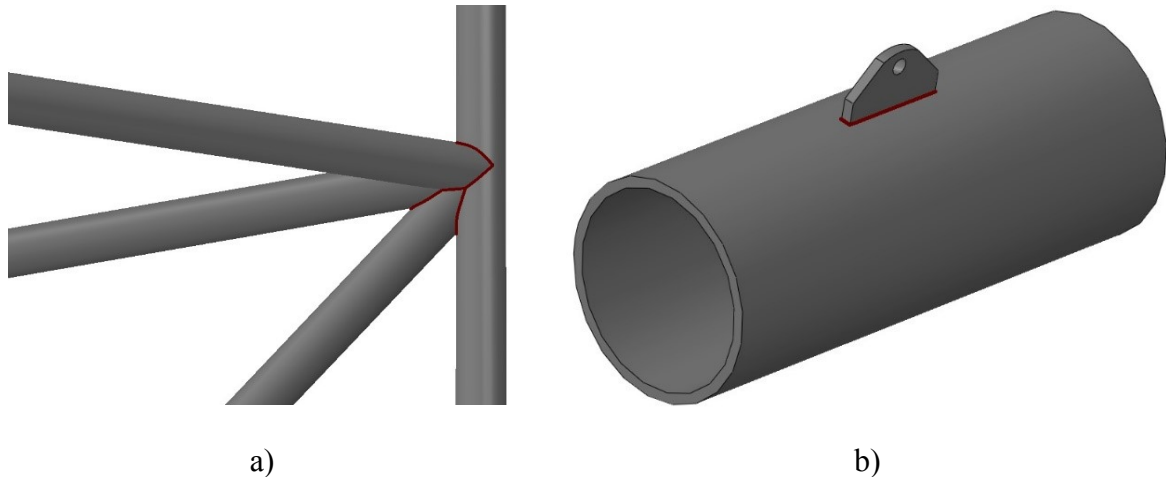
a) Welded connection joint of cylinders and b) welded lug onto a cylinder.
